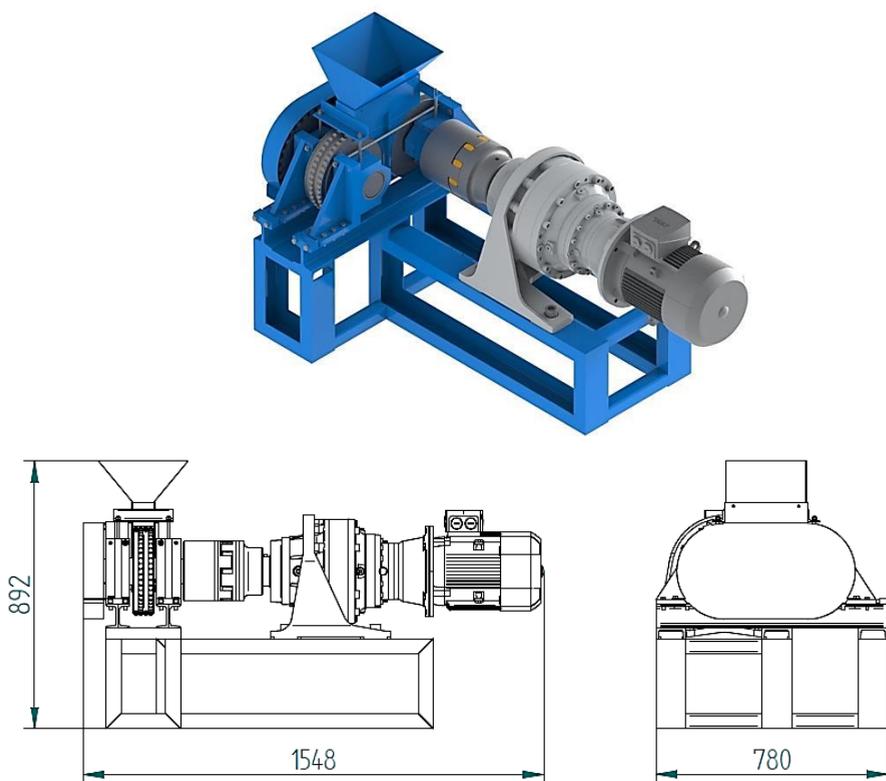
Diagram and overall dimensions of the PW280 roller press.
